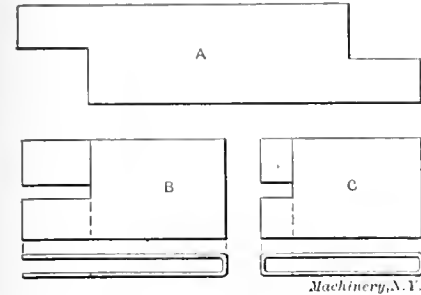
The Blanked Clip and its Shape after the Two Bending Operations
